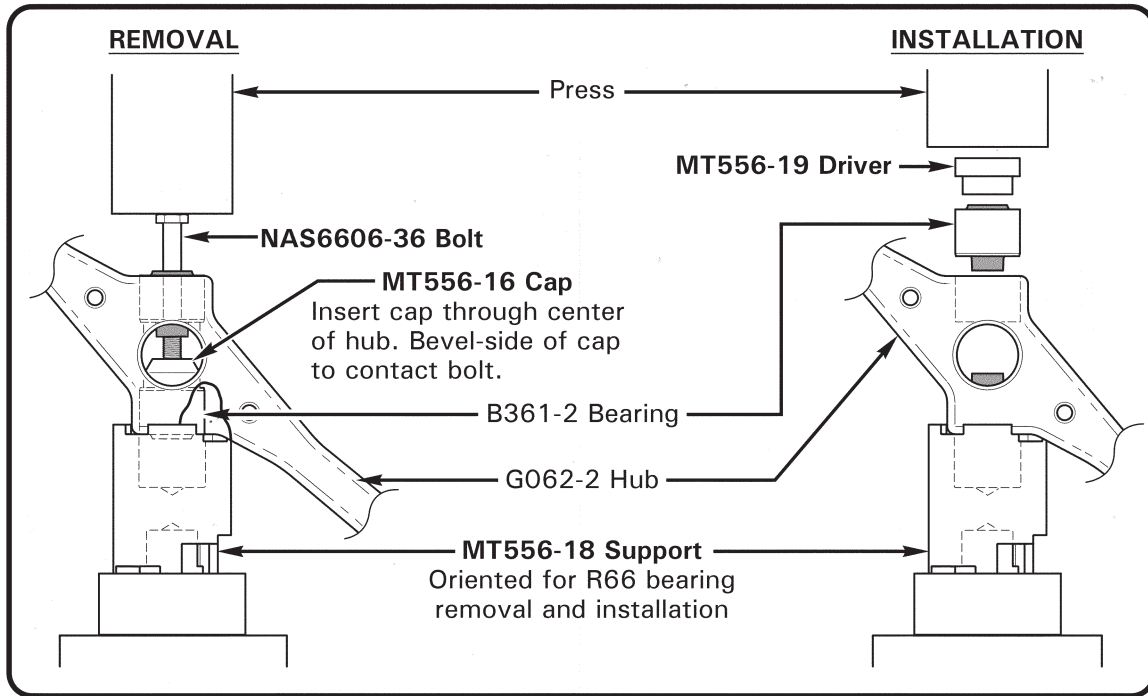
MT556-17 (ALL-MODEL) TAIL ROTOR HUB BEARING REPLACEMENT TOOL KIT
